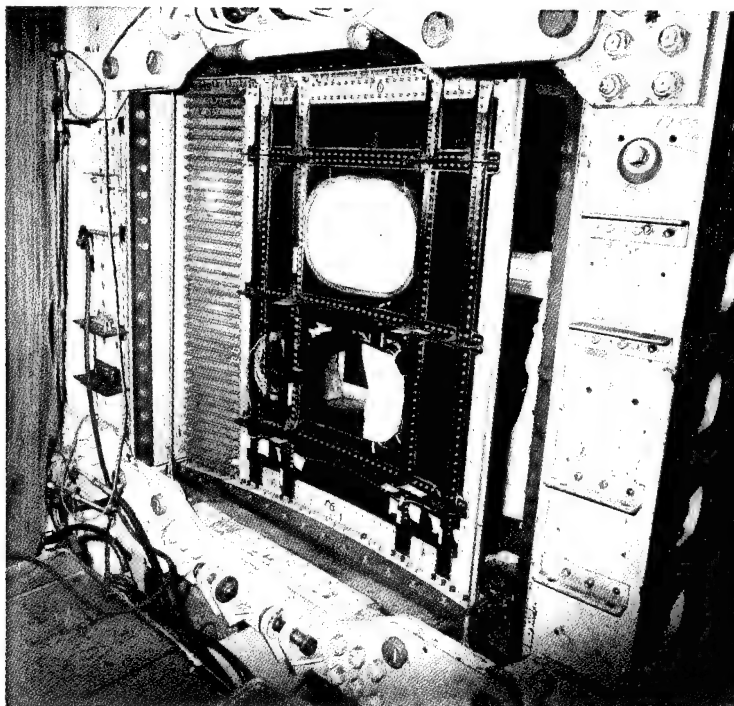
Installation of Composite Window Belt Panel Assembly into Test Fixture
